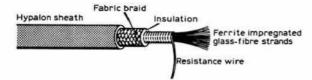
Construction of one form of inductive ignition cable. The core is finer and contains more strands than can be shown in this drawing Electronics Australia
